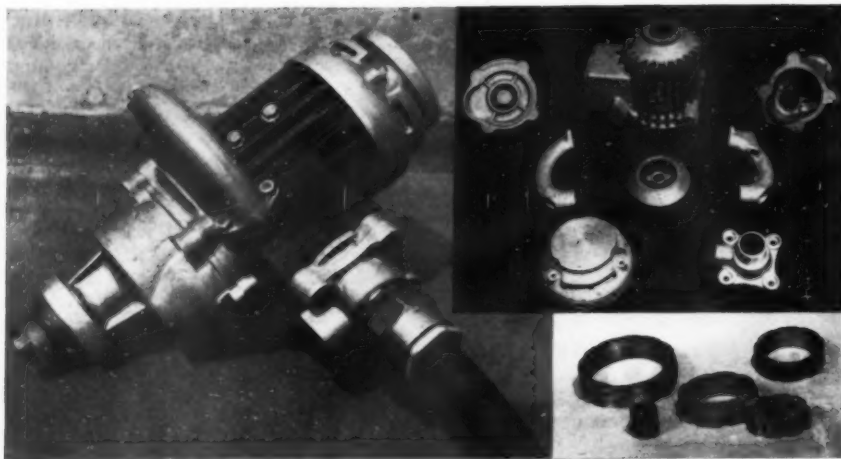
Pneumatic coal drill using 10 Elektron castings, with typical inserts. Castings by Birmingham Aluminium Castings (1903) Co., Ltd.
